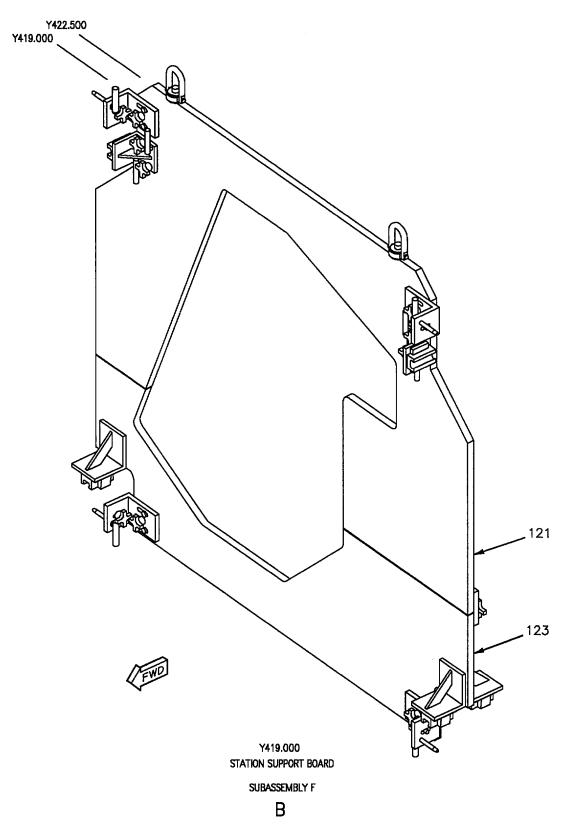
Engine Air Inlet Maintenance Fixture; RE174322020-1 (Sheet 3)
